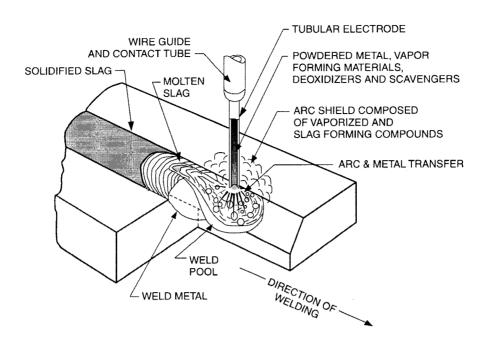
Self-Shielded Flux Cored Arc Welding
